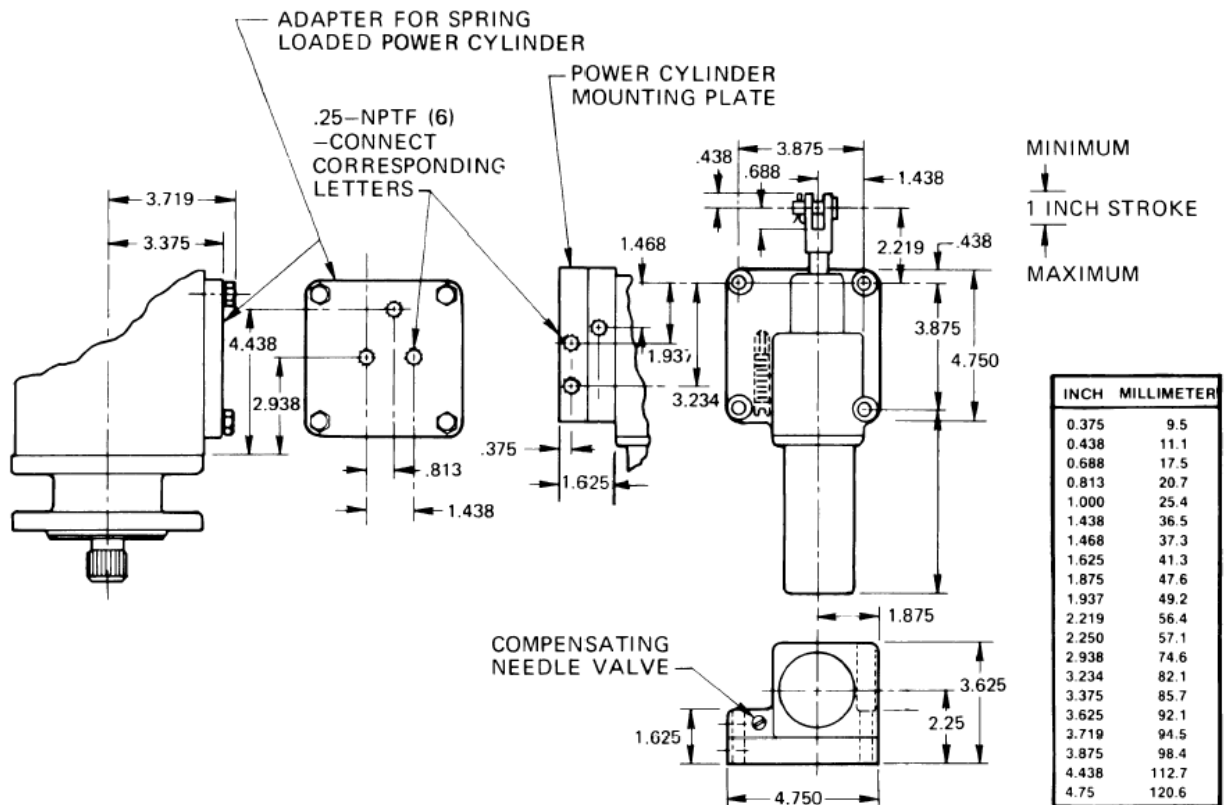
Outline of Remote Spring-Loaded Power Cylinder
